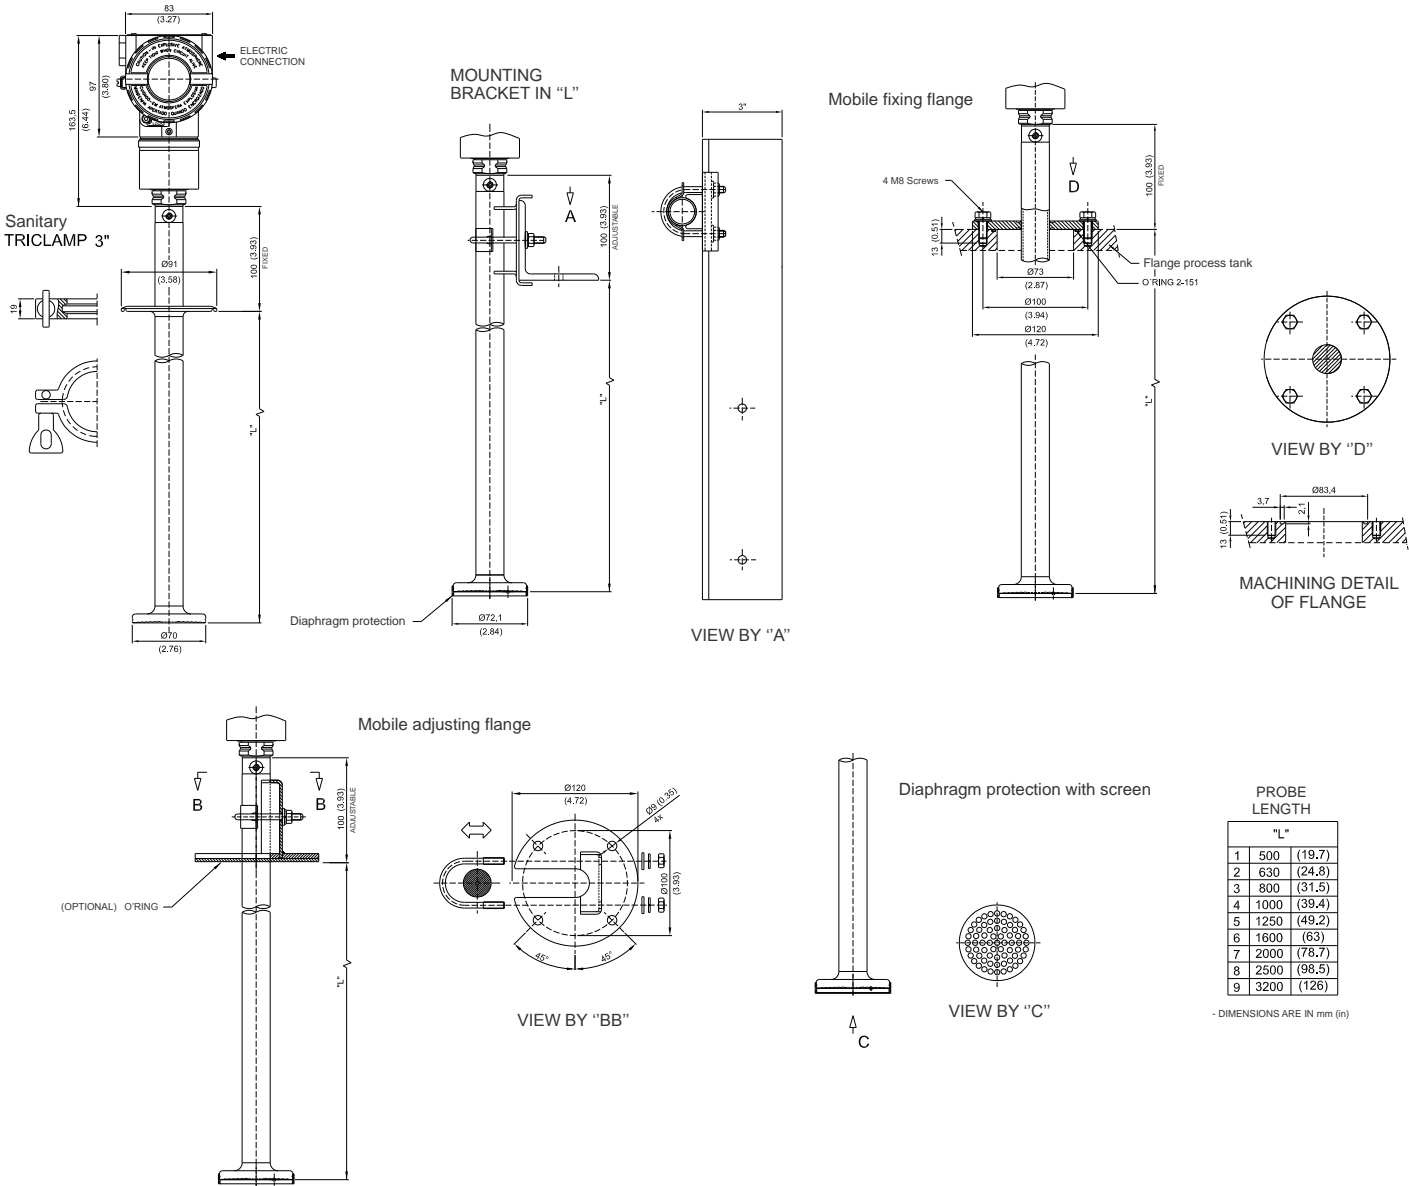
(e) – Dimensional Drawing and Mounting Position for LD290 – Level (Insertion)
